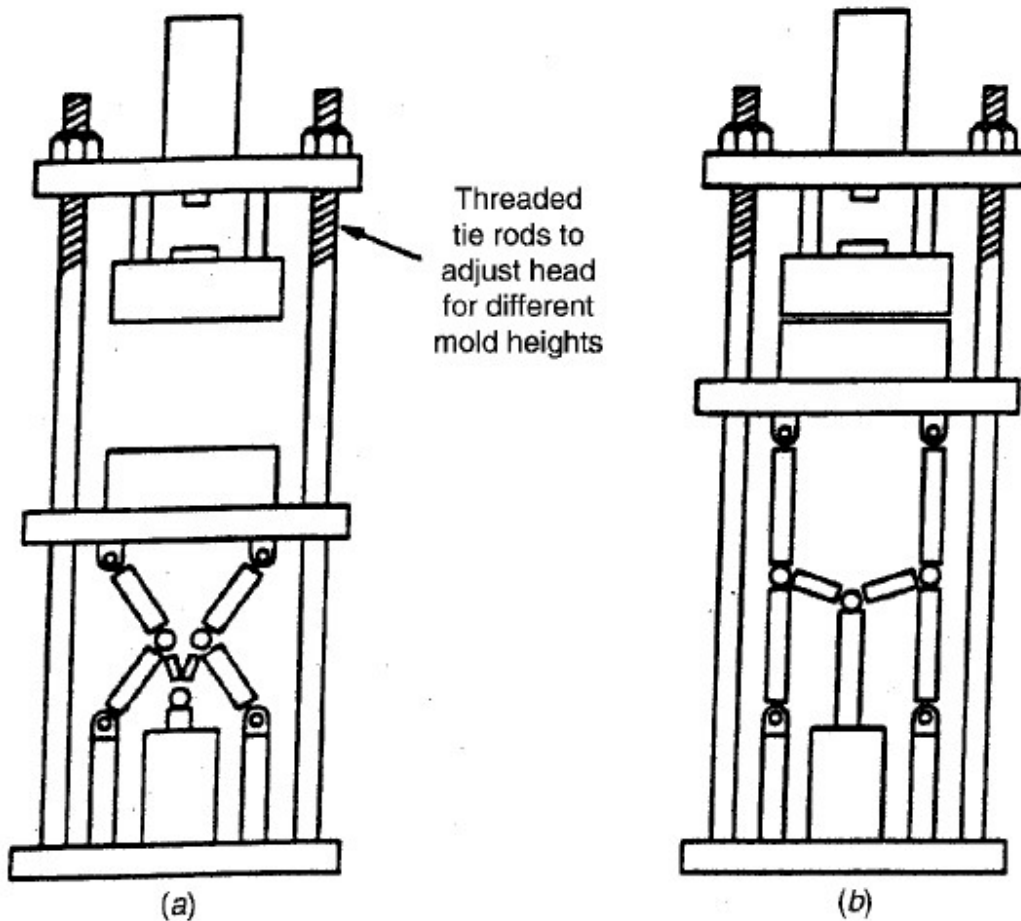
Toggle press: (a) open; (b) closed. Threaded tie rods are used to adjust the head for different mold heights.
